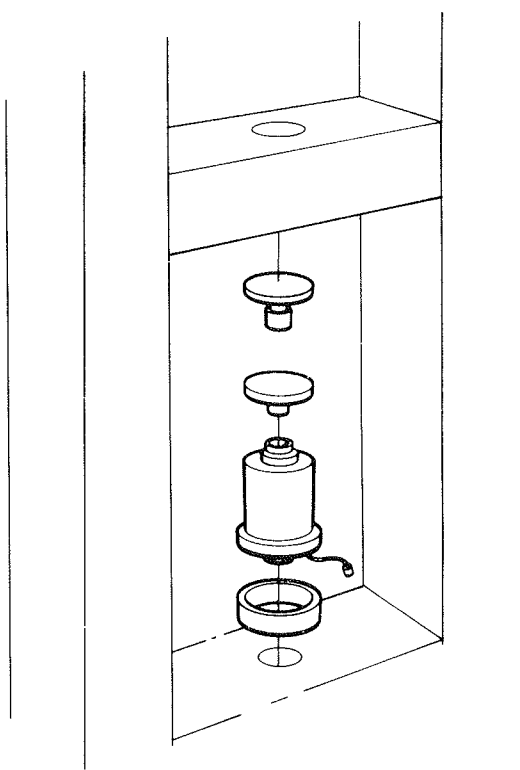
Compression Load Cell Installation on Base of Loading Frame
